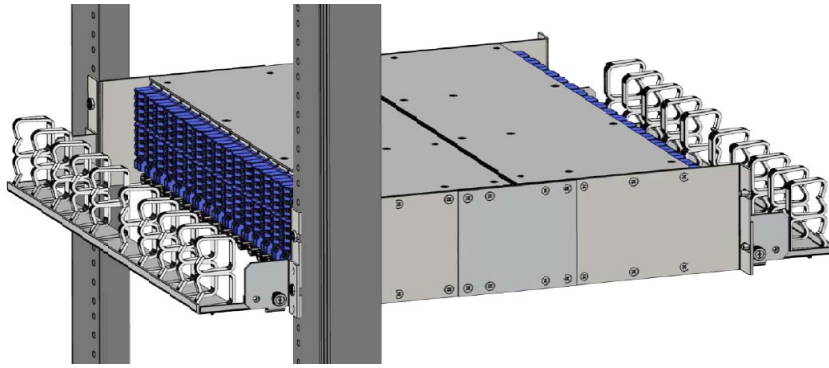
Dual Front and Rear Loading Chassis with Optional Cable Management Tray
